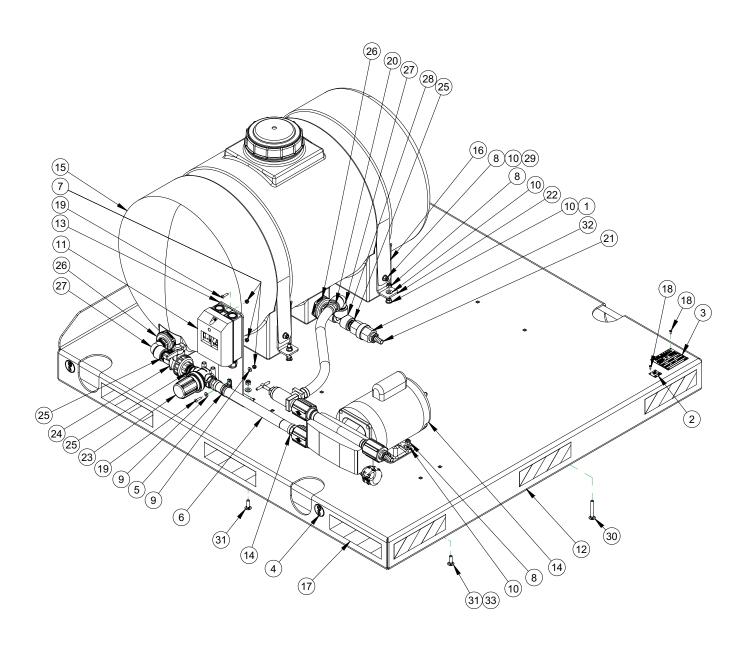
35-GALLON (132-LITER) RECIRCULATION TANK ASSEMBLY (P/N 90544)
